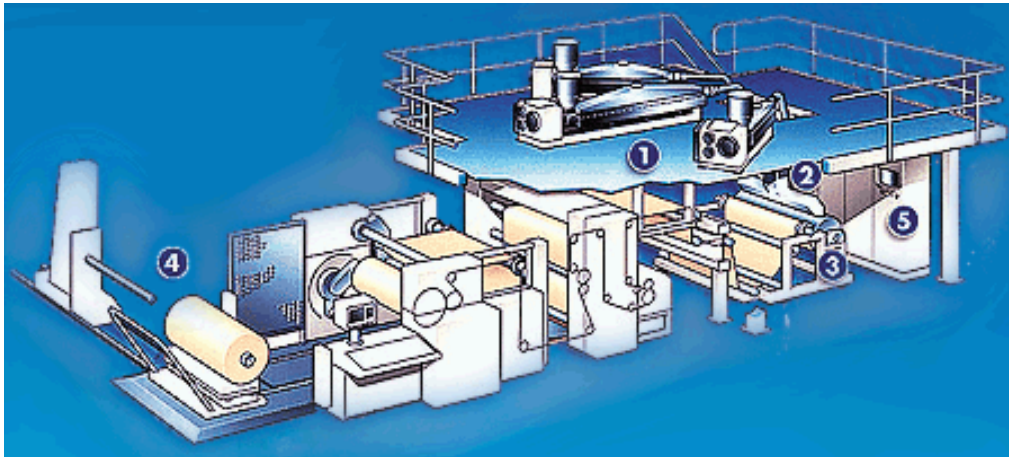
Coextrusion flat film line. (1) Extruders; (2) die; (3) casting section; (4) winder.
